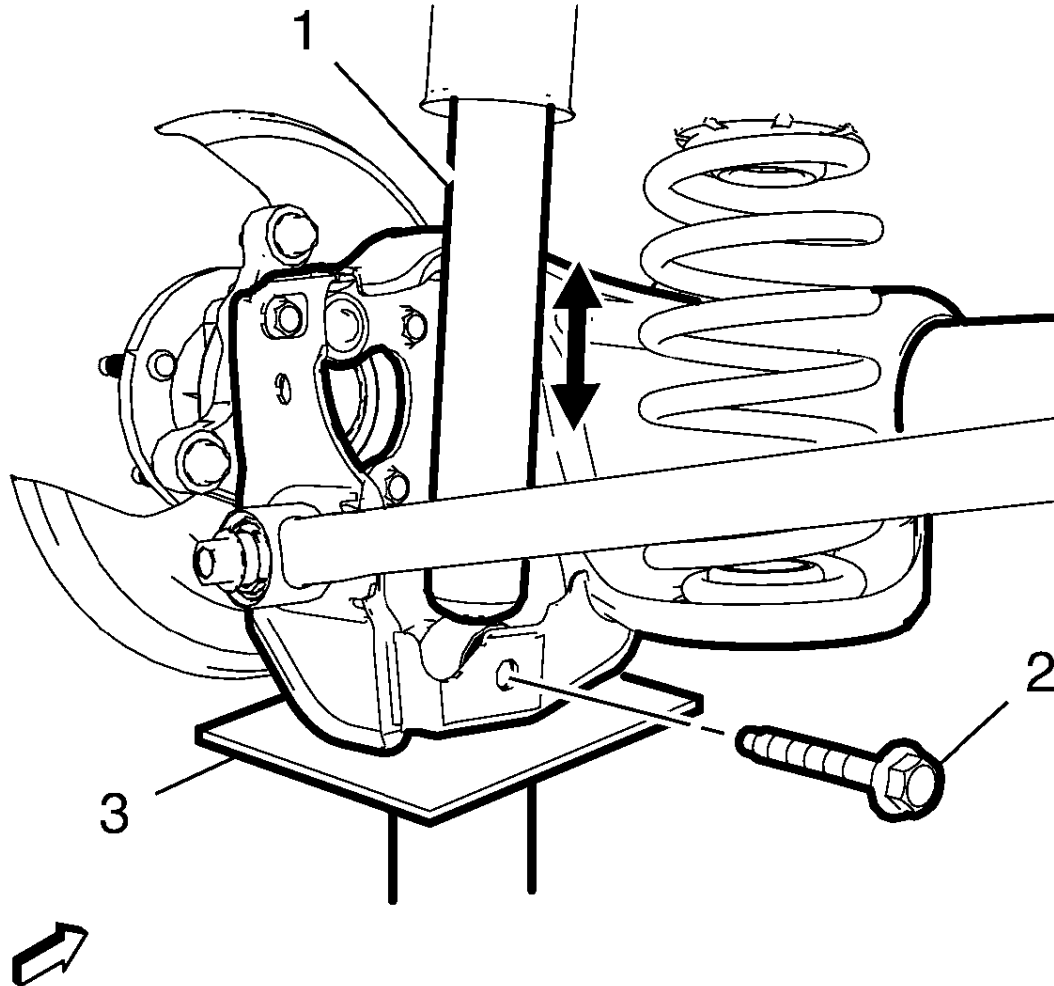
Rear Shock Absorber, Bolt And Hydraulic Lift
